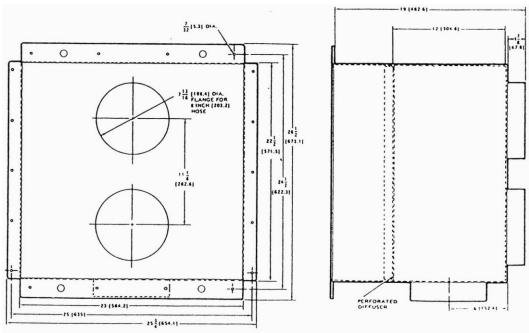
66 SIZE SOURCE CAPTURE PLENUM DIMENSION
